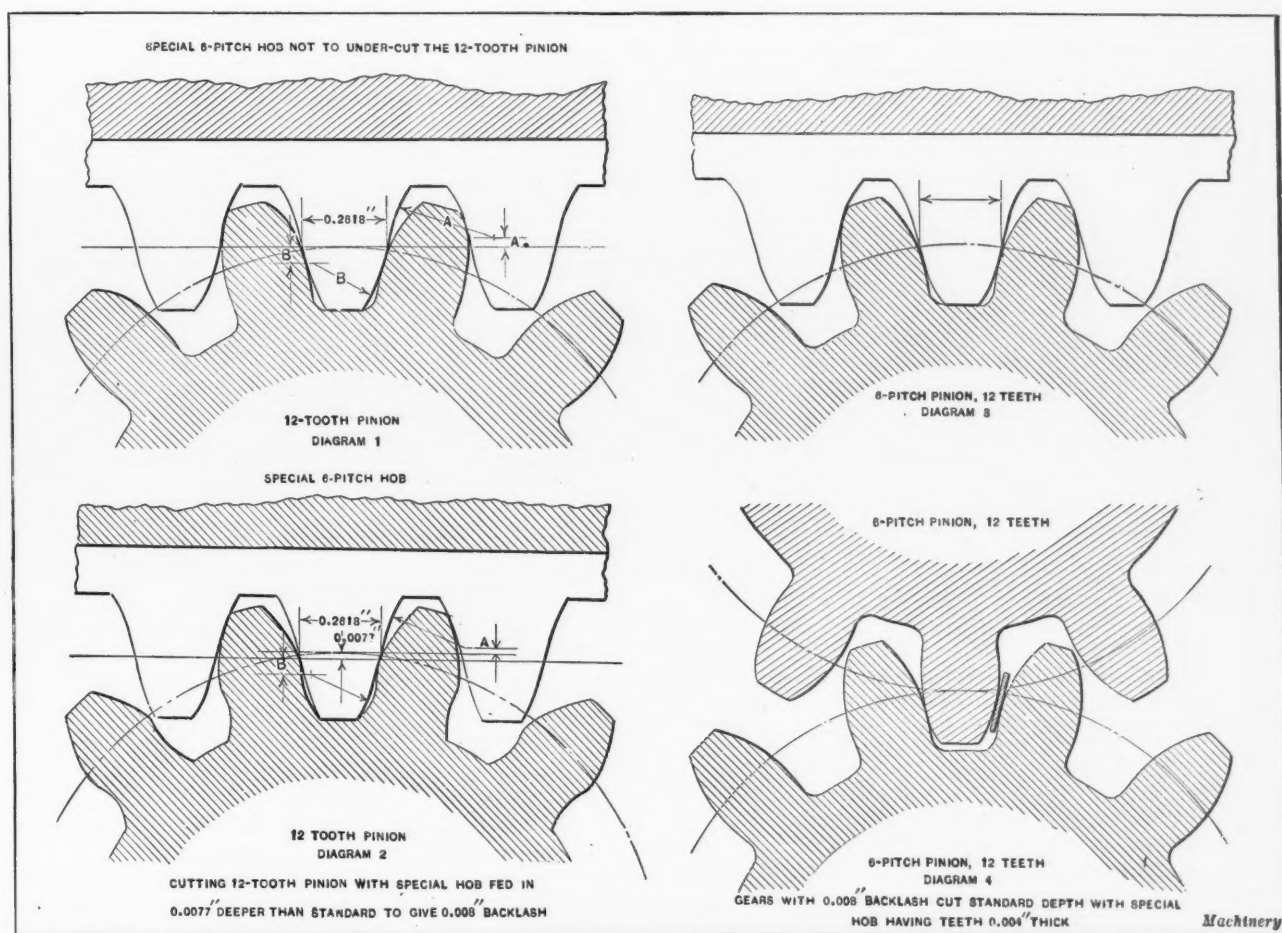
(Diagram 1) Cutting Twelve-tooth Pinion without Backlash by the Use of Special Hob. (Diagram 2) Cutting Twelve-tooth Pinion with Special Hob Deeper than Standard to give Backlash. (Diagram 3) Cutting Twelve-tooth Pinion with Special Hob having Teeth Thicker than Standard to give Backlash. (Diagram 4) Gears with Backlash, cut to Standard Depth with Special Hob having Teeth Thicker than Standard
